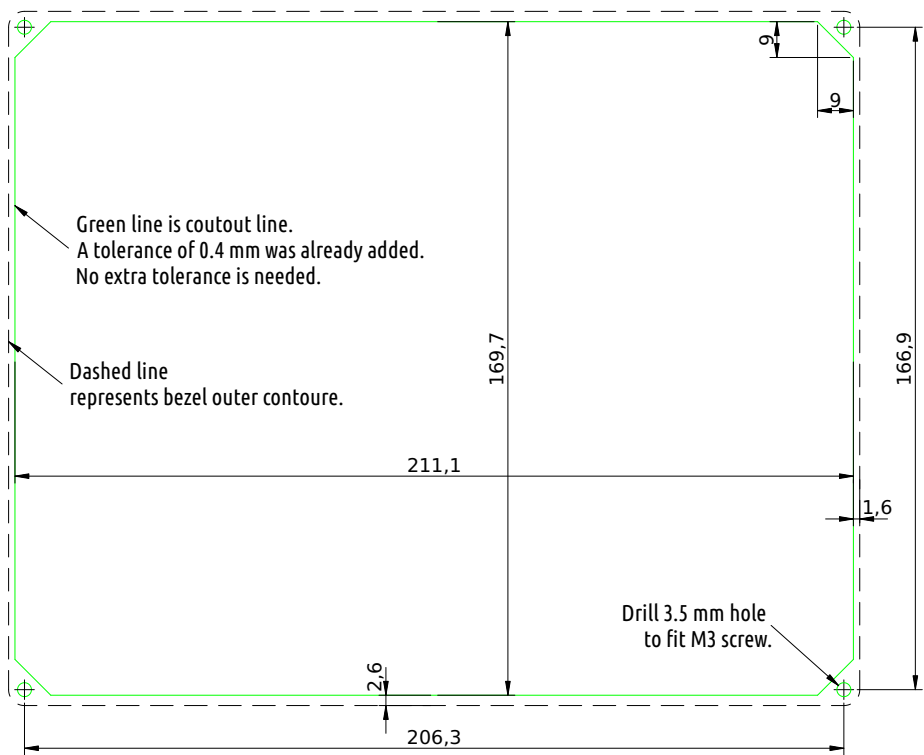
Nesis cutout dimensions. The figure is not actual size!
